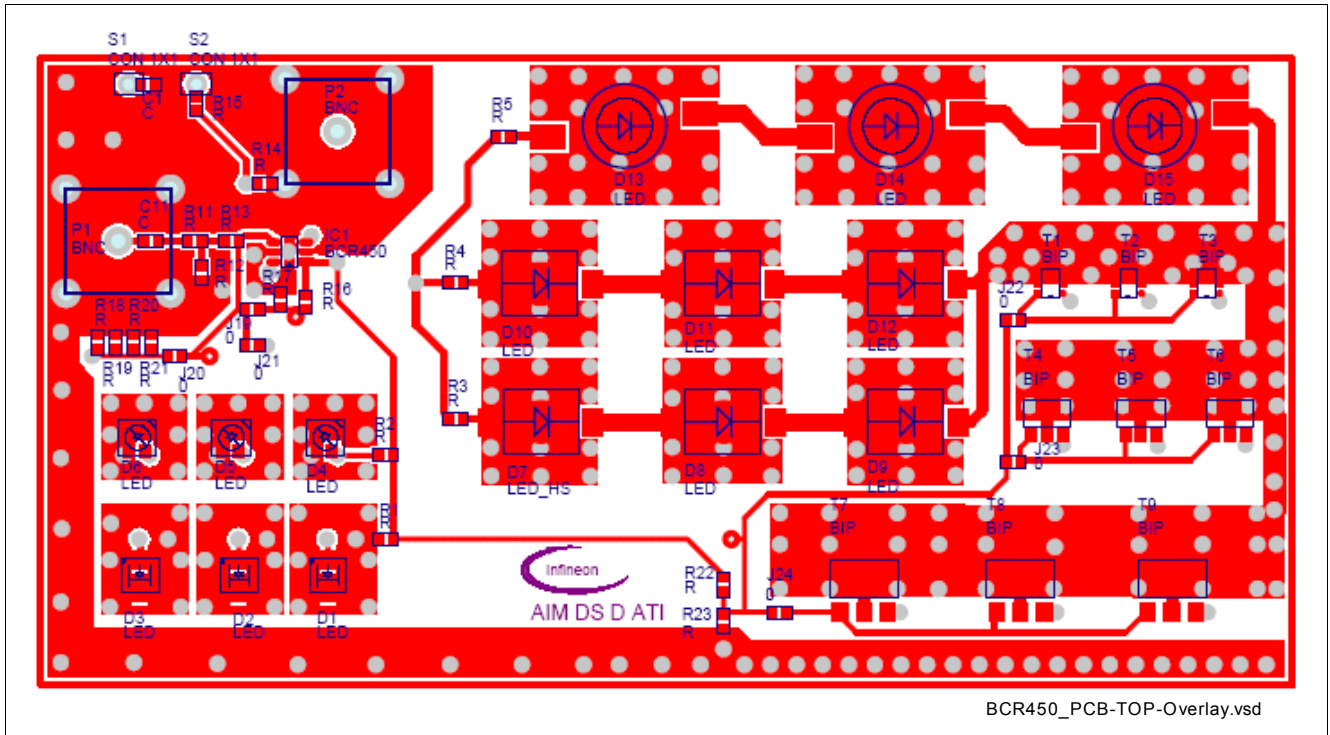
Top view on evaluation board (dimension 60 mm x 120 mm)
